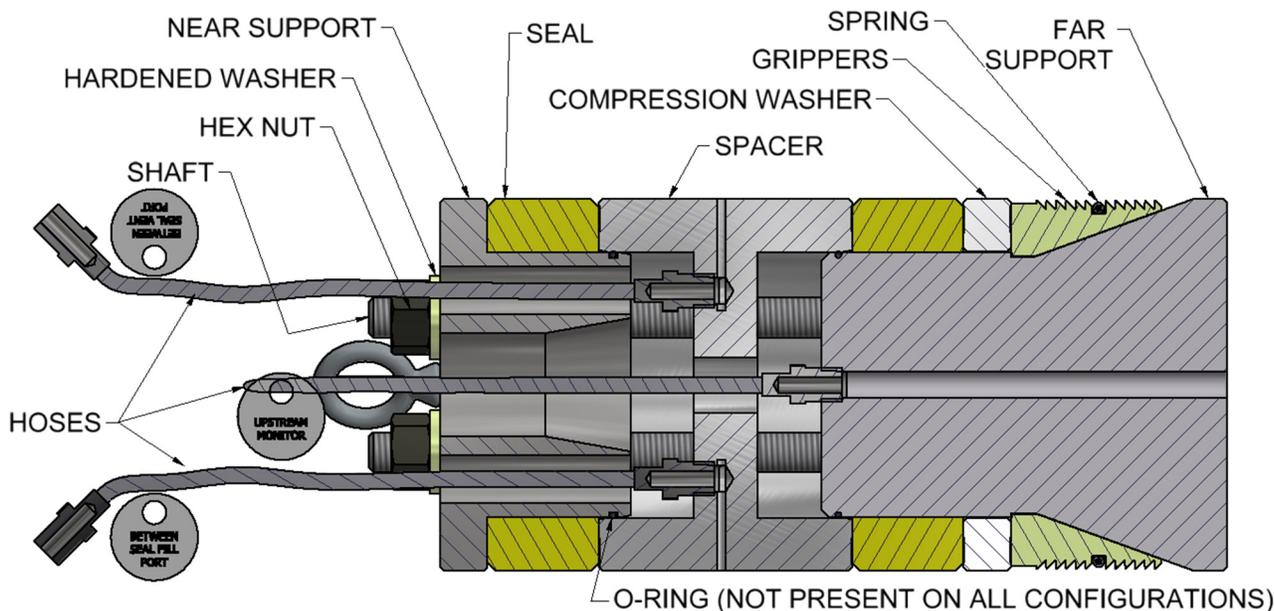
GripTight Isolation Plug 4" - 6" Plug Components
